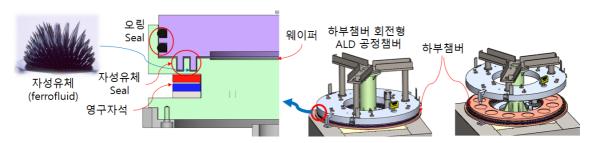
The present designed rotary ALD process chamber with ferrofluid vacuum sealing.
